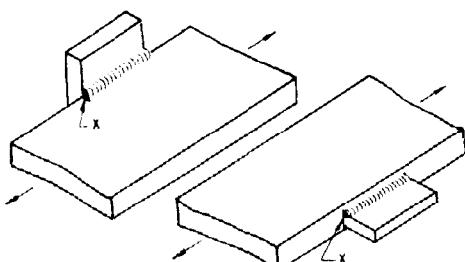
TYPICAL CLASS F WELD DETAILS
